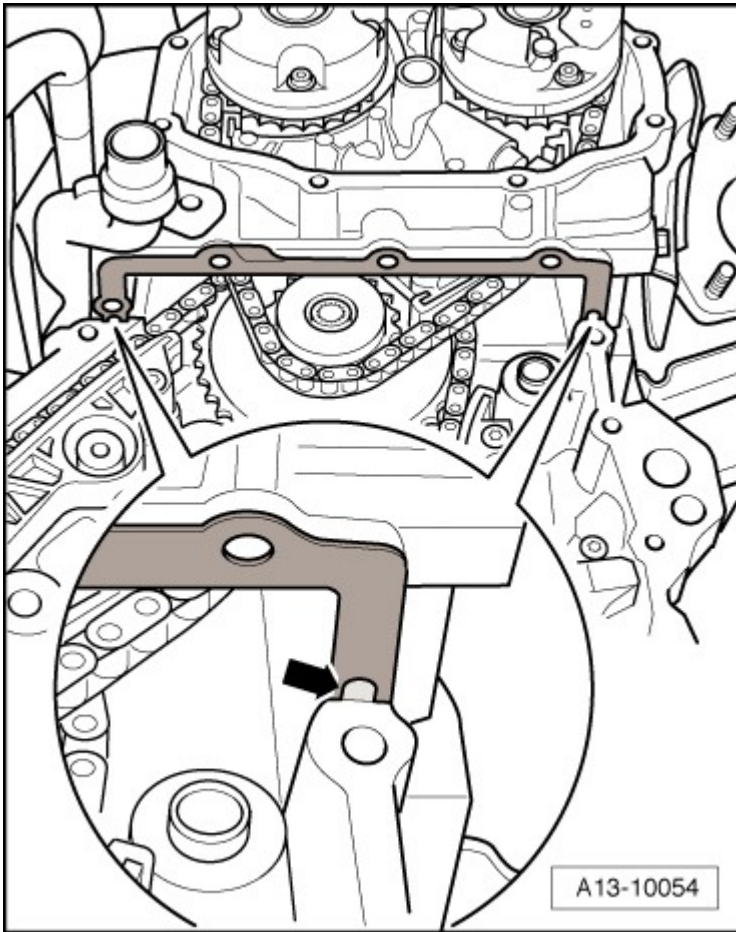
Cleaning Old Sealant From Holes In Cylinder Head Gaskets
